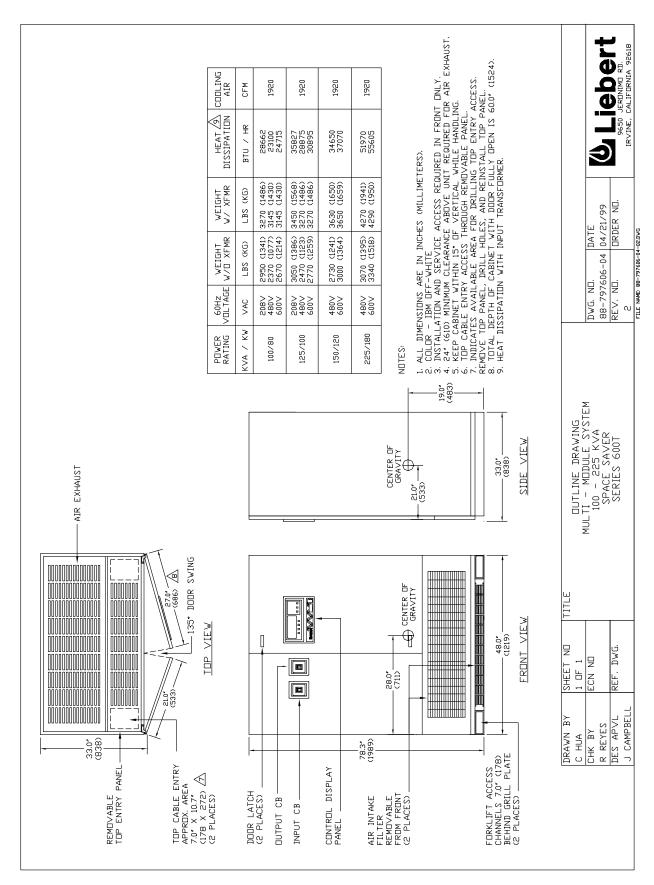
Outline Drawing, Multi-Module System, 100 - 225 kVA
